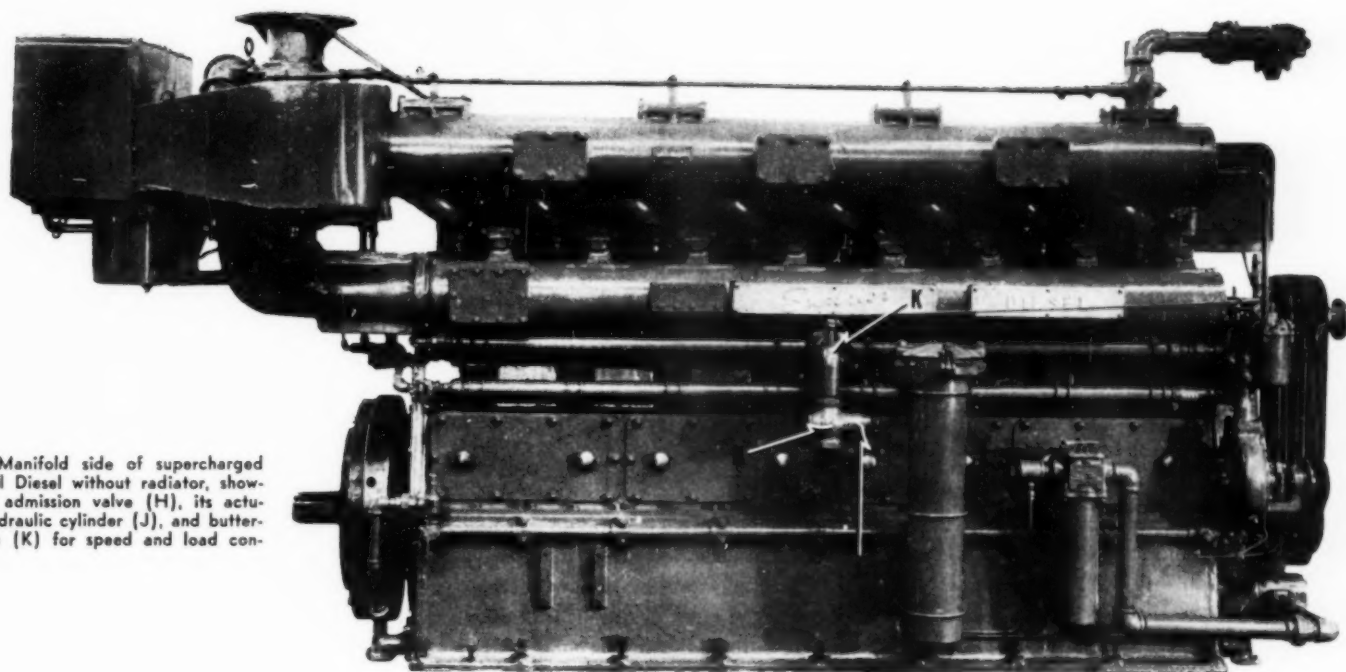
Manifold side of supercharged dual fuel Diesel without radiator, showing gas admission valve (H), its actuating hydraulic cylinder (J), and butterfly valve (K) for speed and load control.
